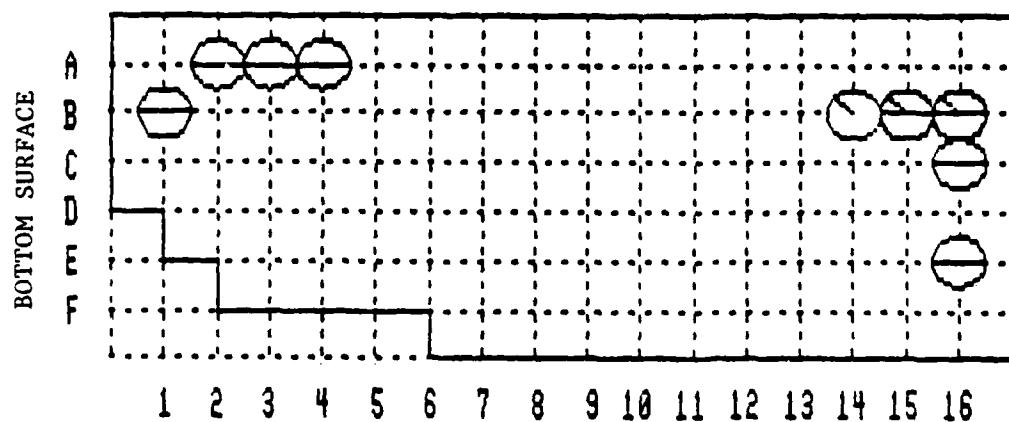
Locations of Flaw Indications Found on Specimen 10 (Helicopter Tail Rotor Blade)
